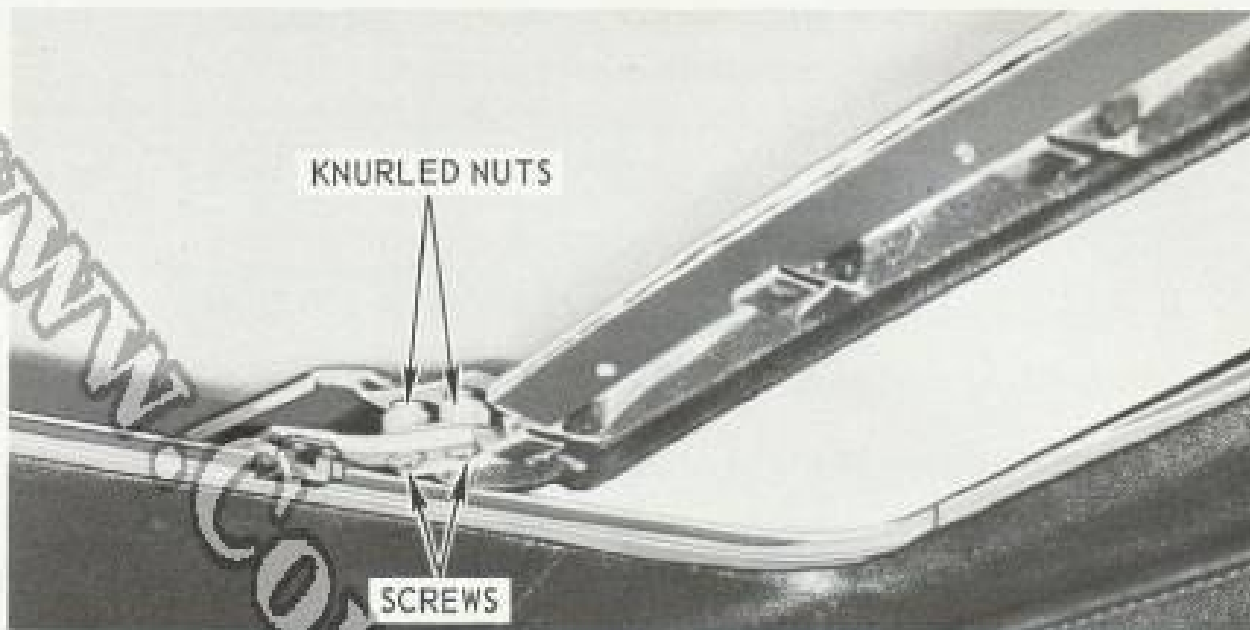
Front Slide Installation on Guide Rail Upper Track
